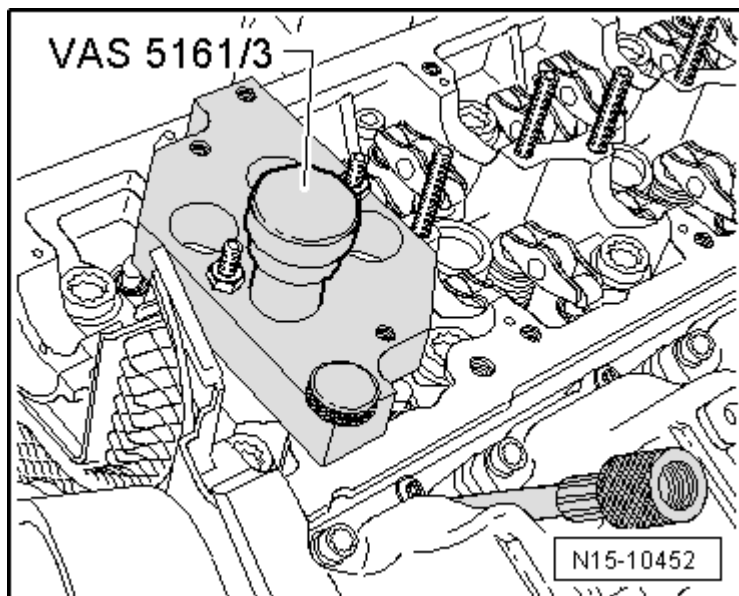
Identifying Punch VAS 5161/3 Installed In Guide Plate VAS 5161/23
